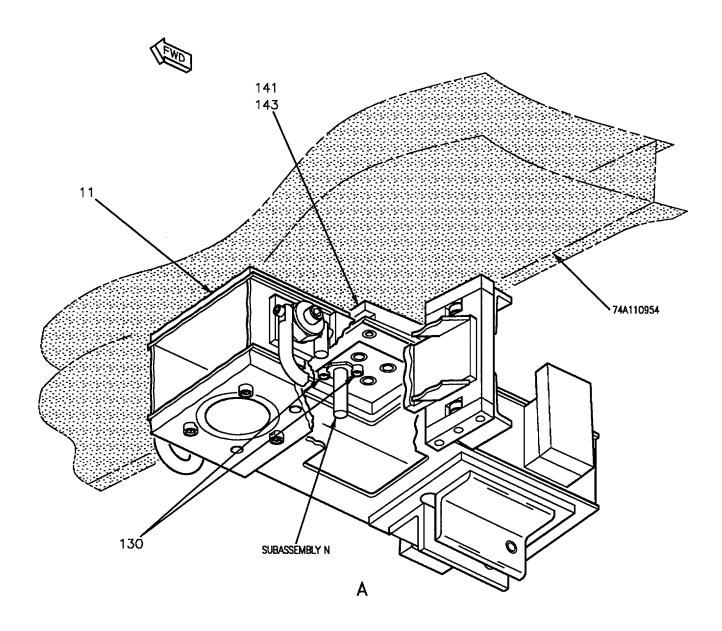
Drilling Holes at Inboard and Outboard Pylon Positions (Sheet 2)
